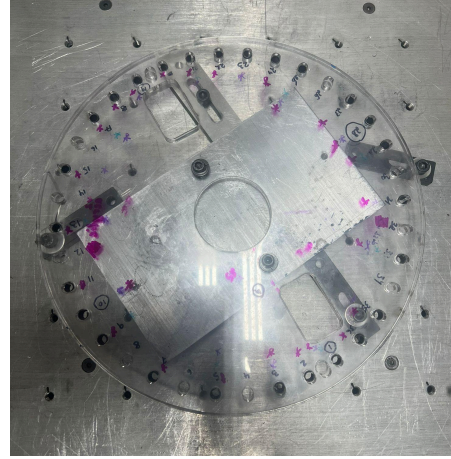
Clear acrylic plates mounted on the fixture in the CMM table show fixture position.
